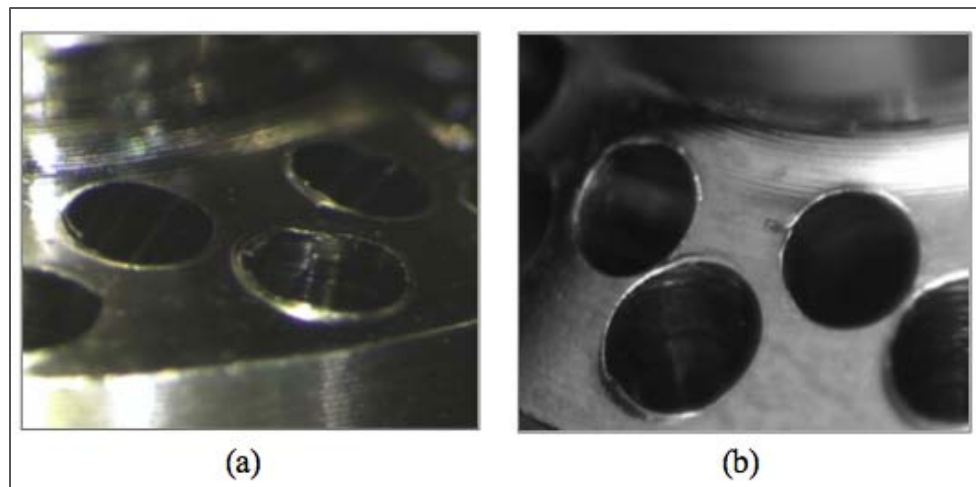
Burr on holes of part B before (a) and after the process (b)
